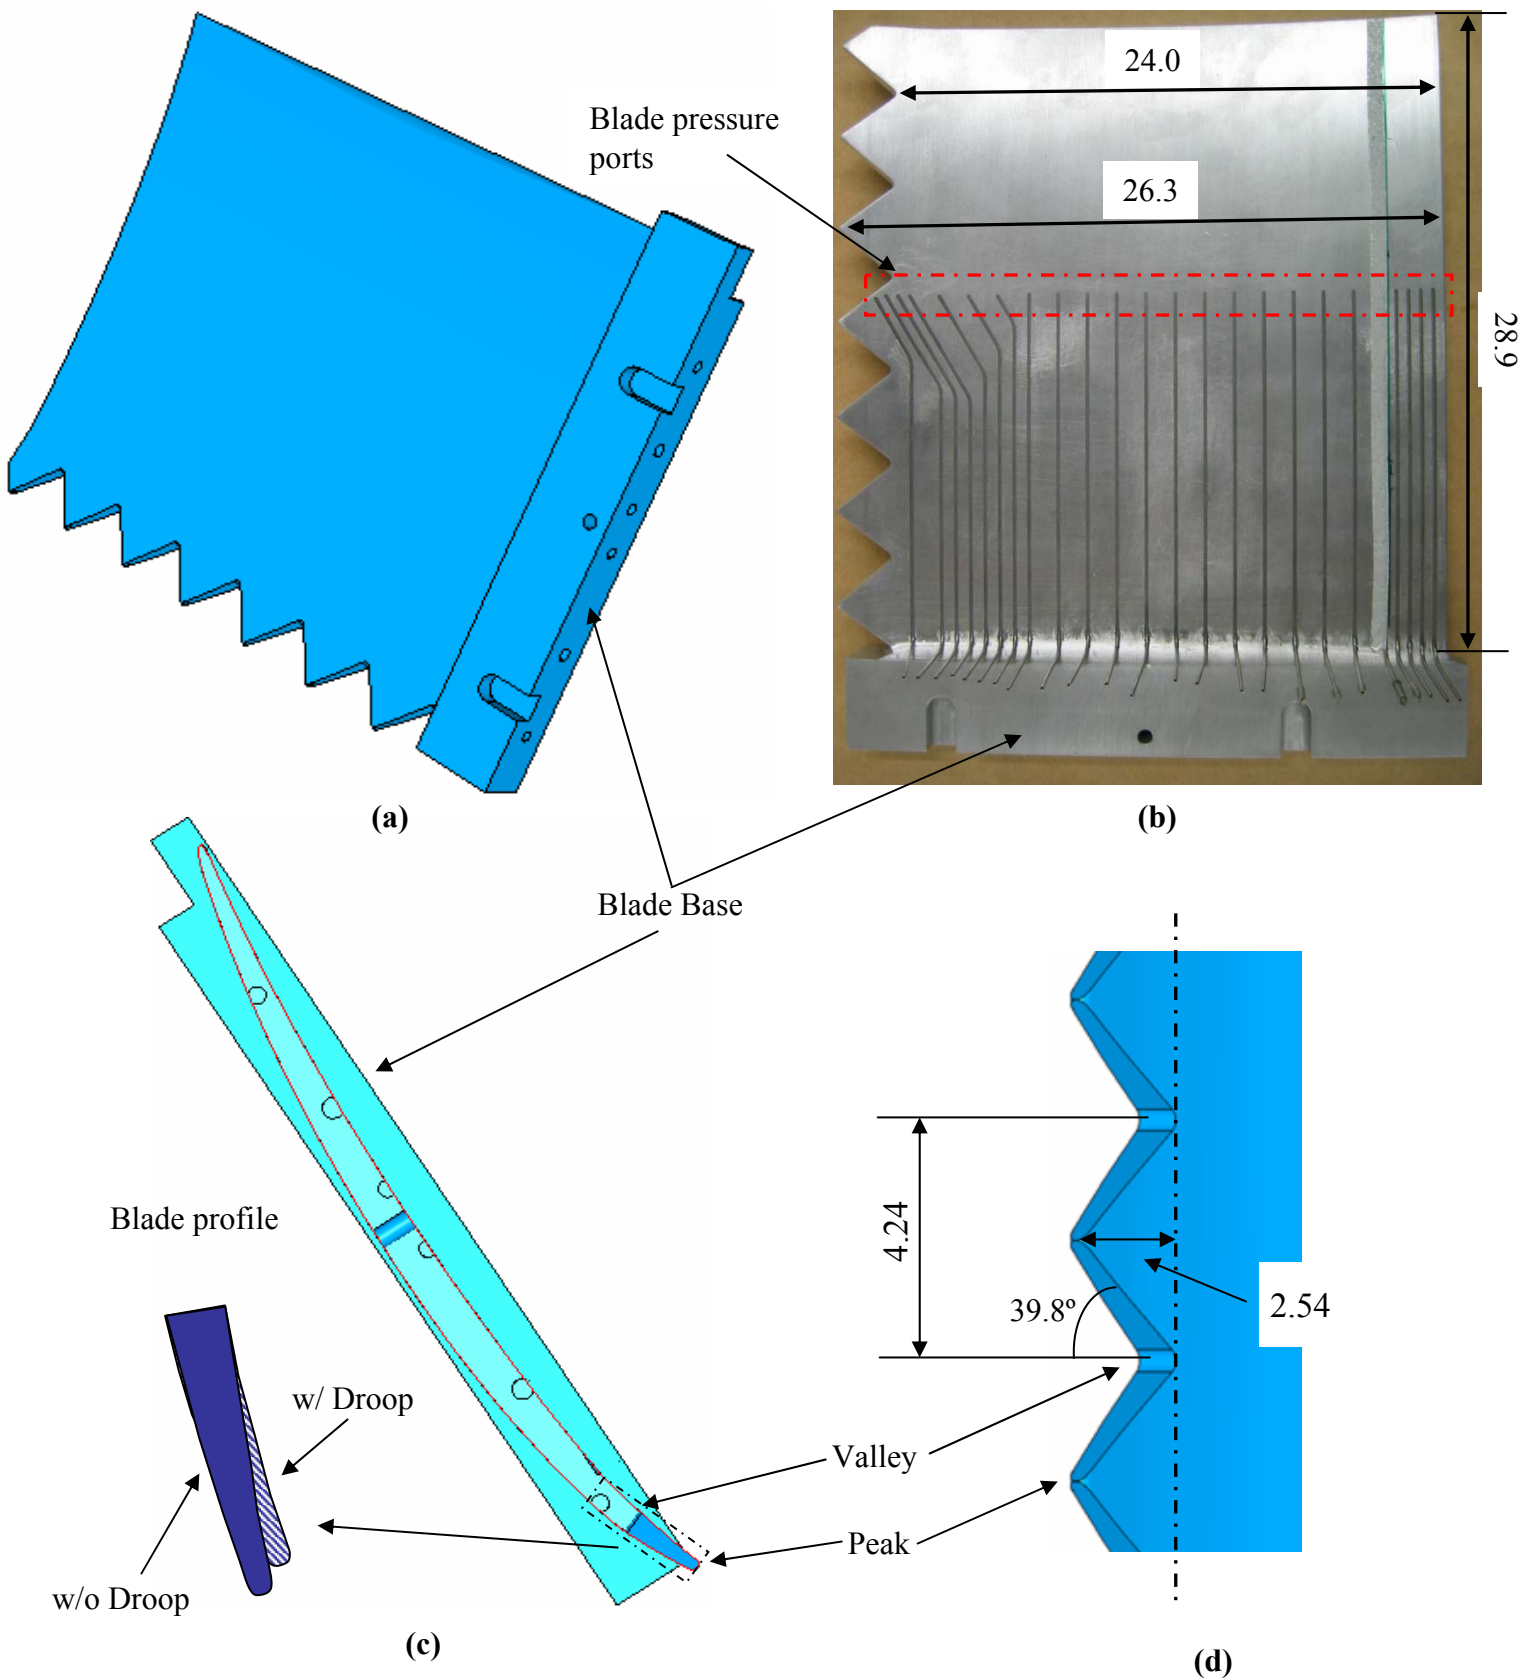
Geometric views of the 2.54 cm droop serrated trailing edge blade: (a) Isometric view (model), (b) plan view (actual), (c) tip view (model), (d) close-up of serrations (model) (all dimensions in cm).
